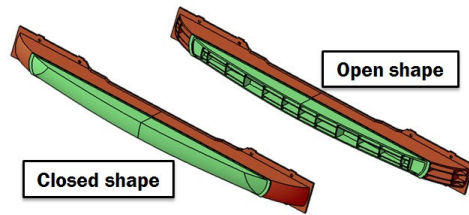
Design alternatives of bumper back-beam according to sectional shape
